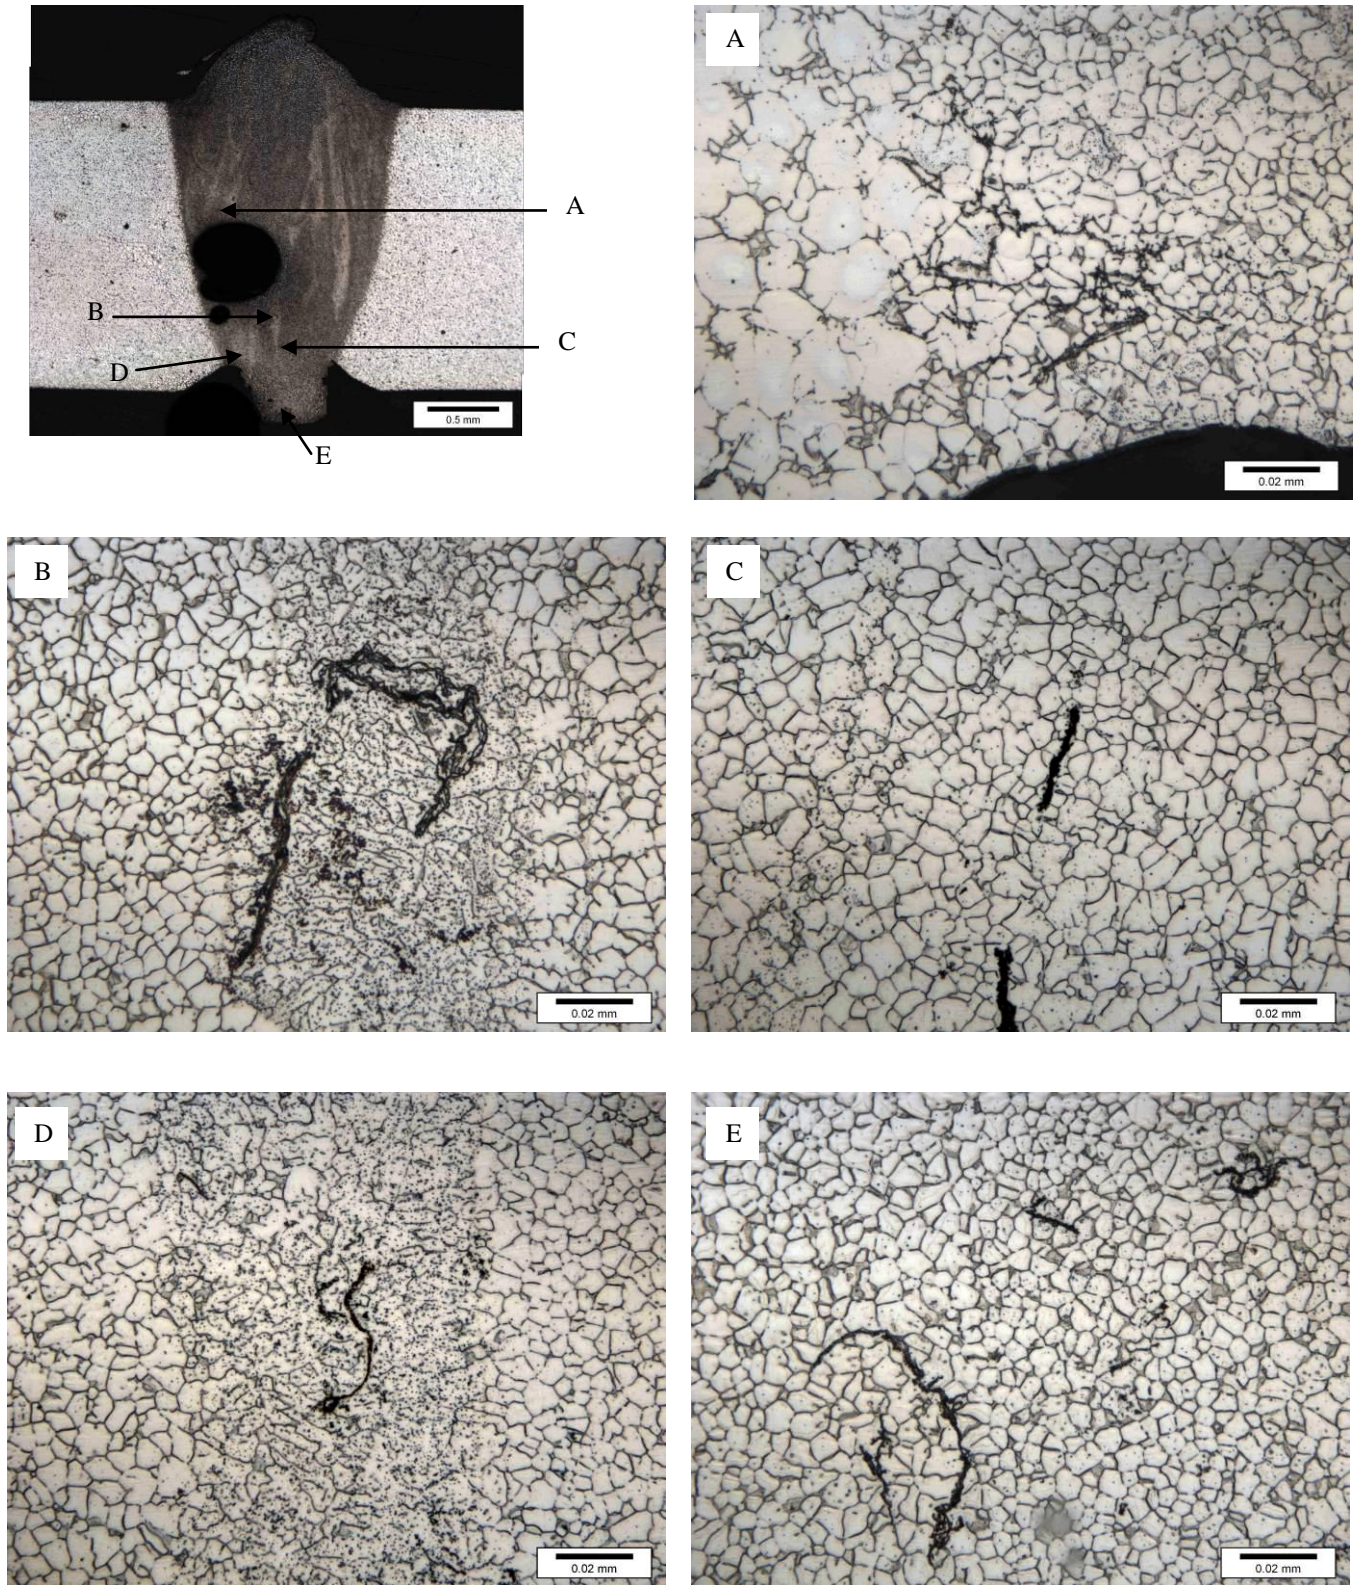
Solidification Cracks in The Sample Welded at 2.75 kW – Ending Section
